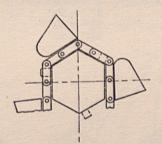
ALTERNATE-TOOTHED SPROCKET.
